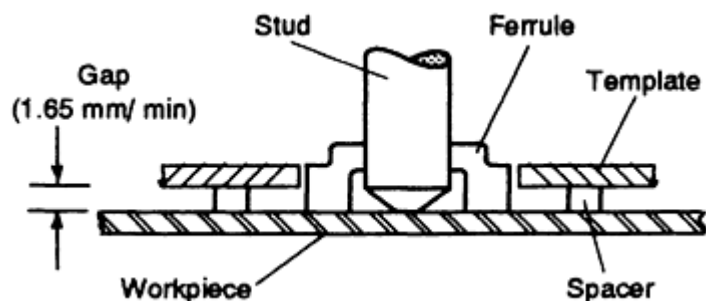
WELDING THROUGH A TEMPLATE USING A FERRULE WITH STUD ARC WELDING FASTENERS
